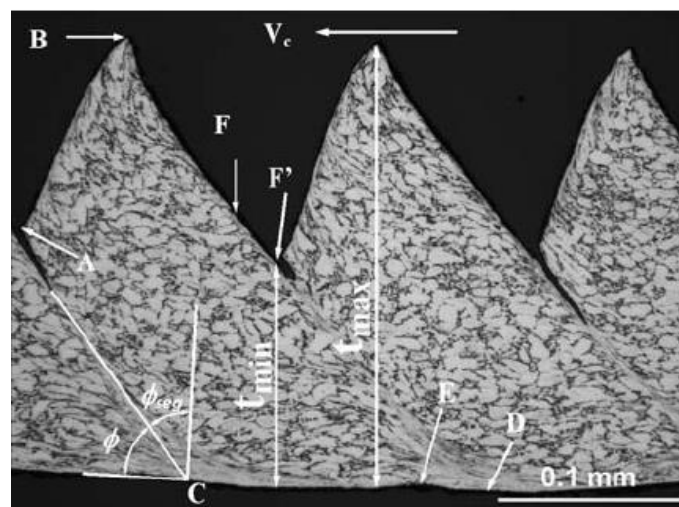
Typical geometric shape of a saw-tooth type chip [22]
